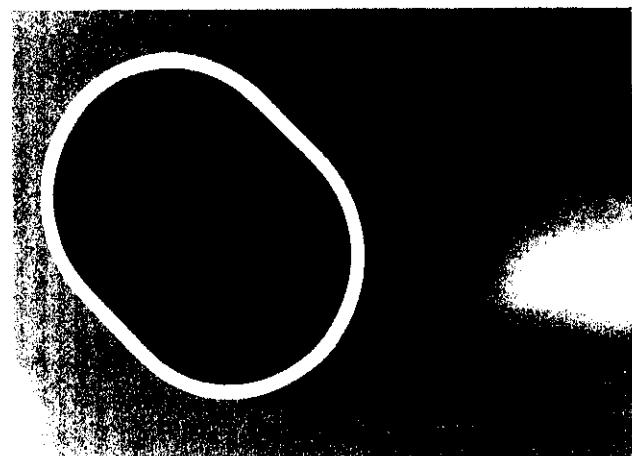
Appearance of pipes produced by CBR mill after expansion (38.1 mm ϕ × 2.0 mm t , R430LNM)
